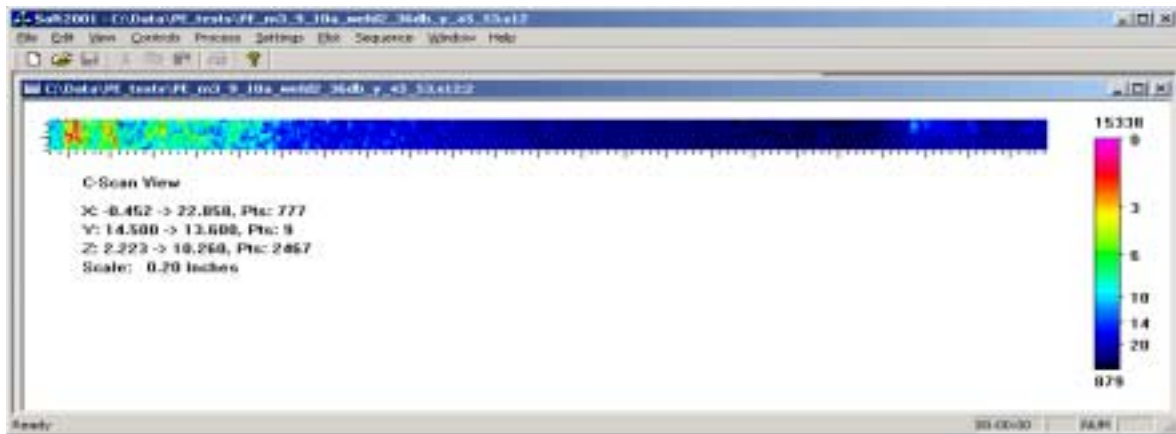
C-Scan view of both the first and second knuckle welds from mockup 3.
